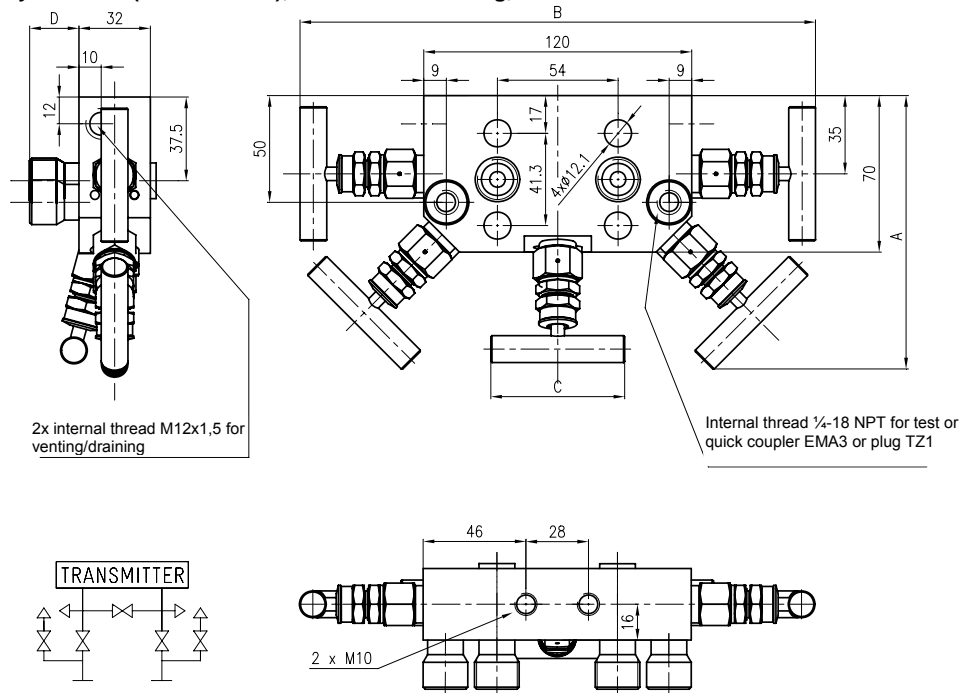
Five-way valve set (964 25.. AS2), dimensional drawing, scheme
